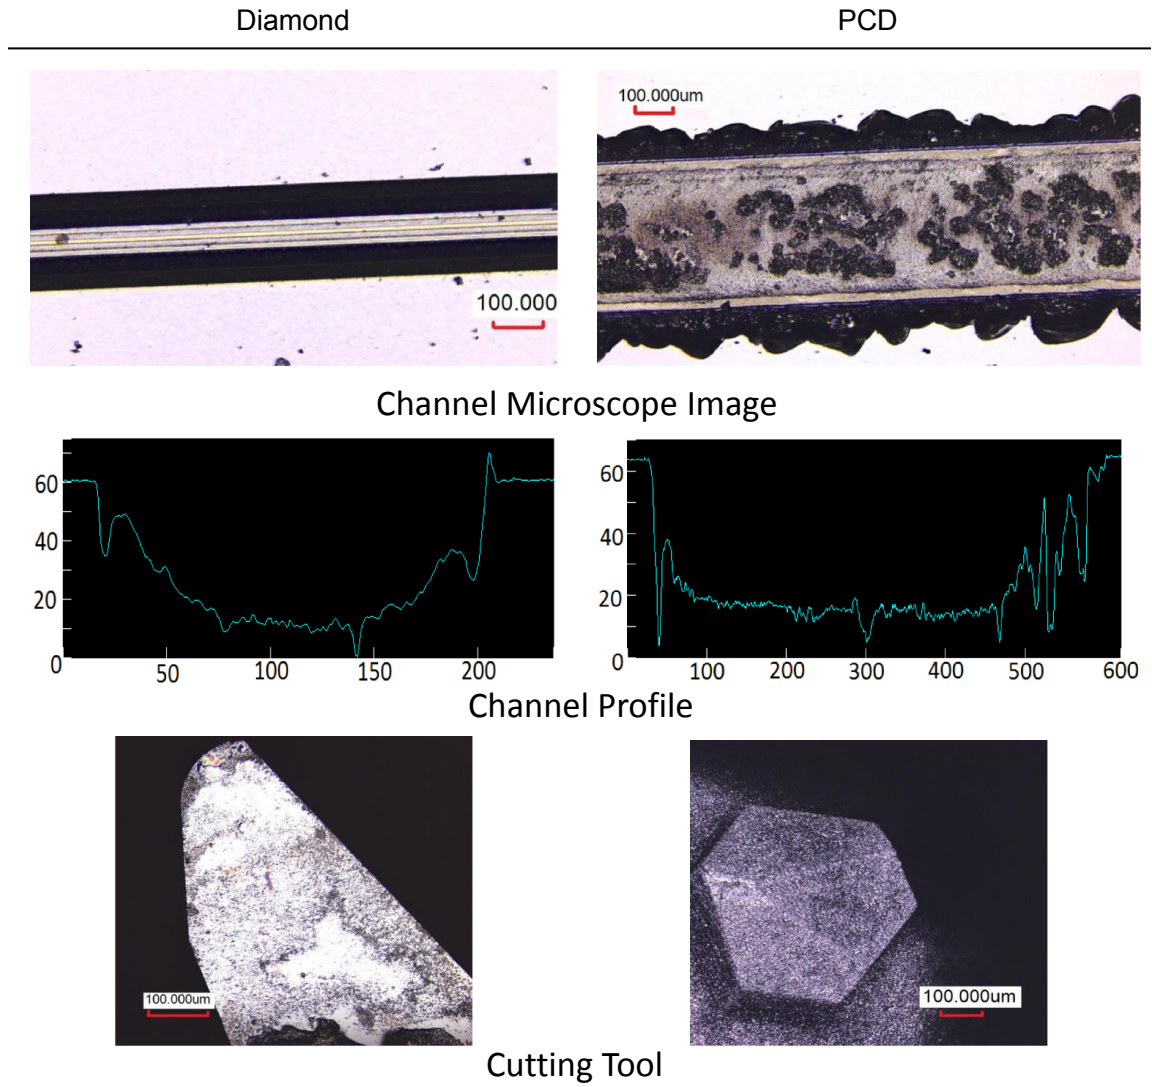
Images of micro-grooves and cutting tools (Case-A, unit: μm)
